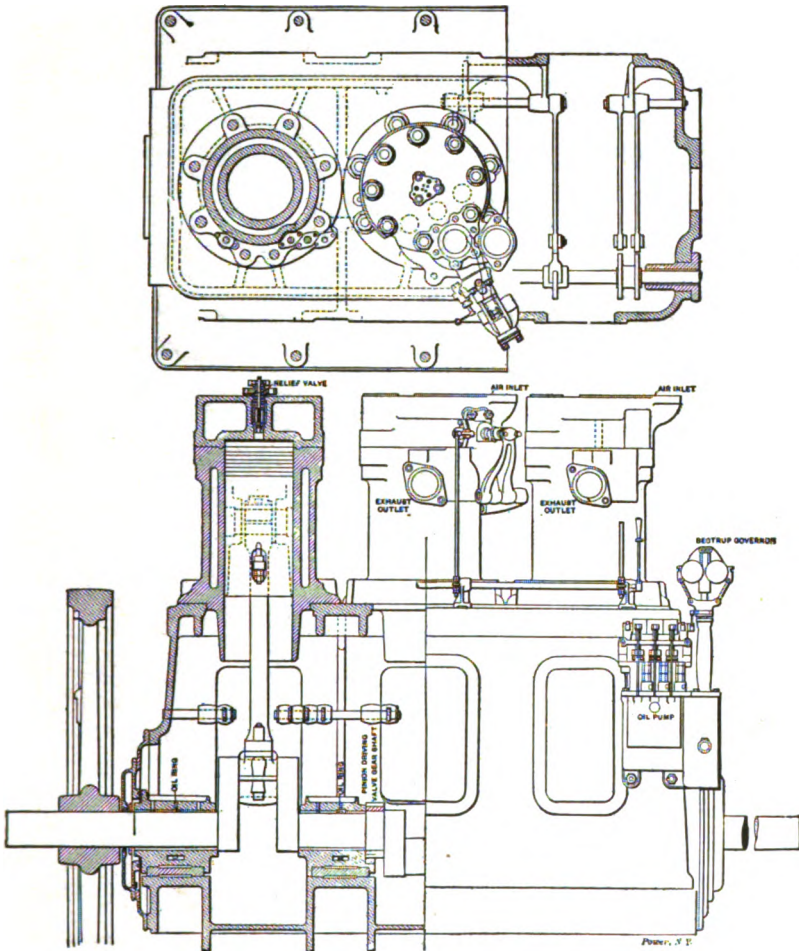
Art. 306.—Diesel Engine. (American Diesel Engine Company.)
